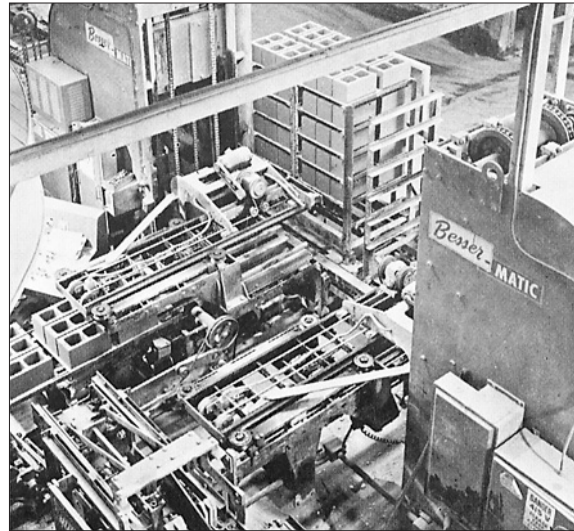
Blockmaking Machine with Automatic Rack Loading and Unloading Equipment
